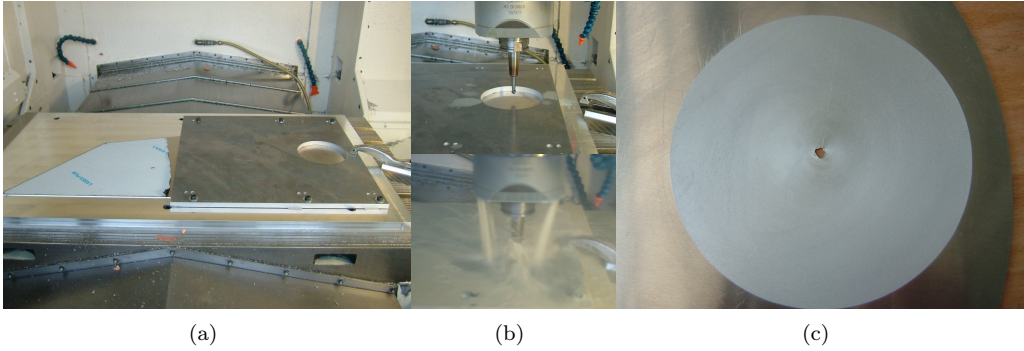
Different steps of the black hole plates machining process. (a) Plate in the cutting machine with additional clamping plate, (b) prepared drill bit and high-speed machining with lubricating oil, (c) final black hole pit presenting a small truncation radius at its centre.
